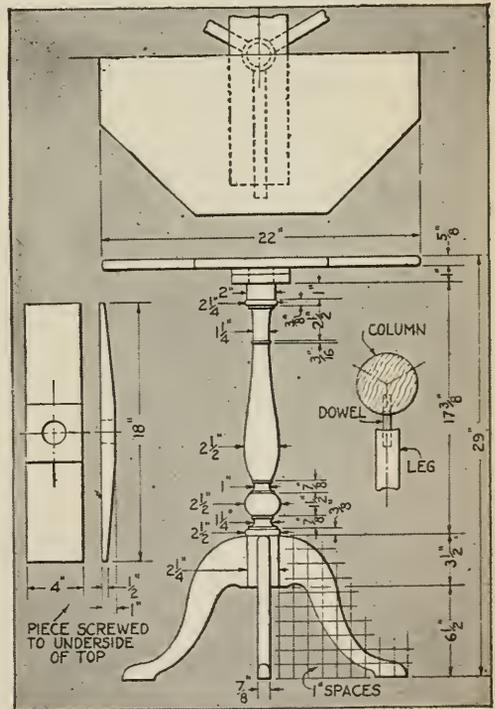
Elevation and partial top view of the table shown in Fig. 29; details of the leg joint and top brace.
